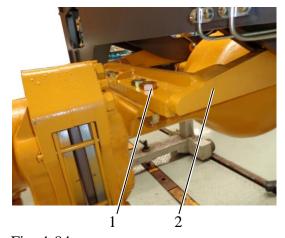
1 Connecting bolt 2 Auxiliary frame
